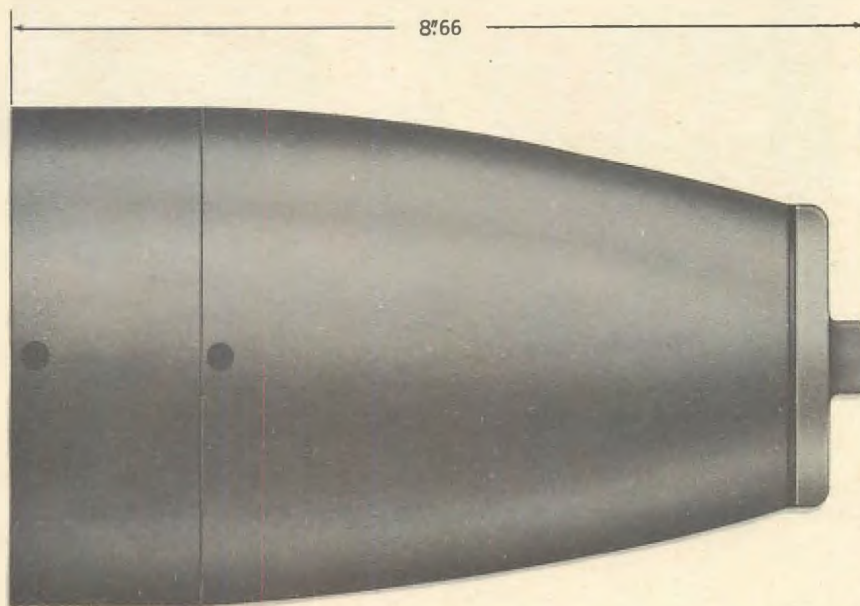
5.0-Inch Rocket Head Mk 7 Mod 2 (HE), External View.
